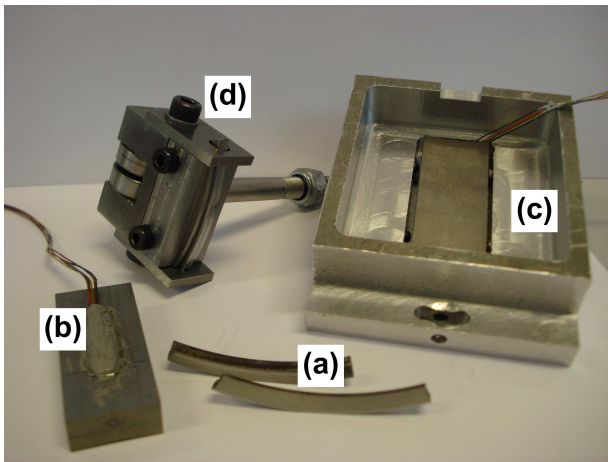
Piston Ring Adapter and Holder, (a) Piston Ring sections, (b) Cylinder liner section with ultrasonic transducers attached to the back side, (c) Oil bath and cylinder liner holder, (d) Ring adapter.
